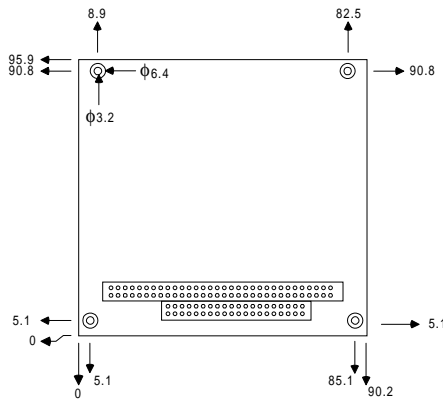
PC/104 module dimensions (mm) (±0.1)
